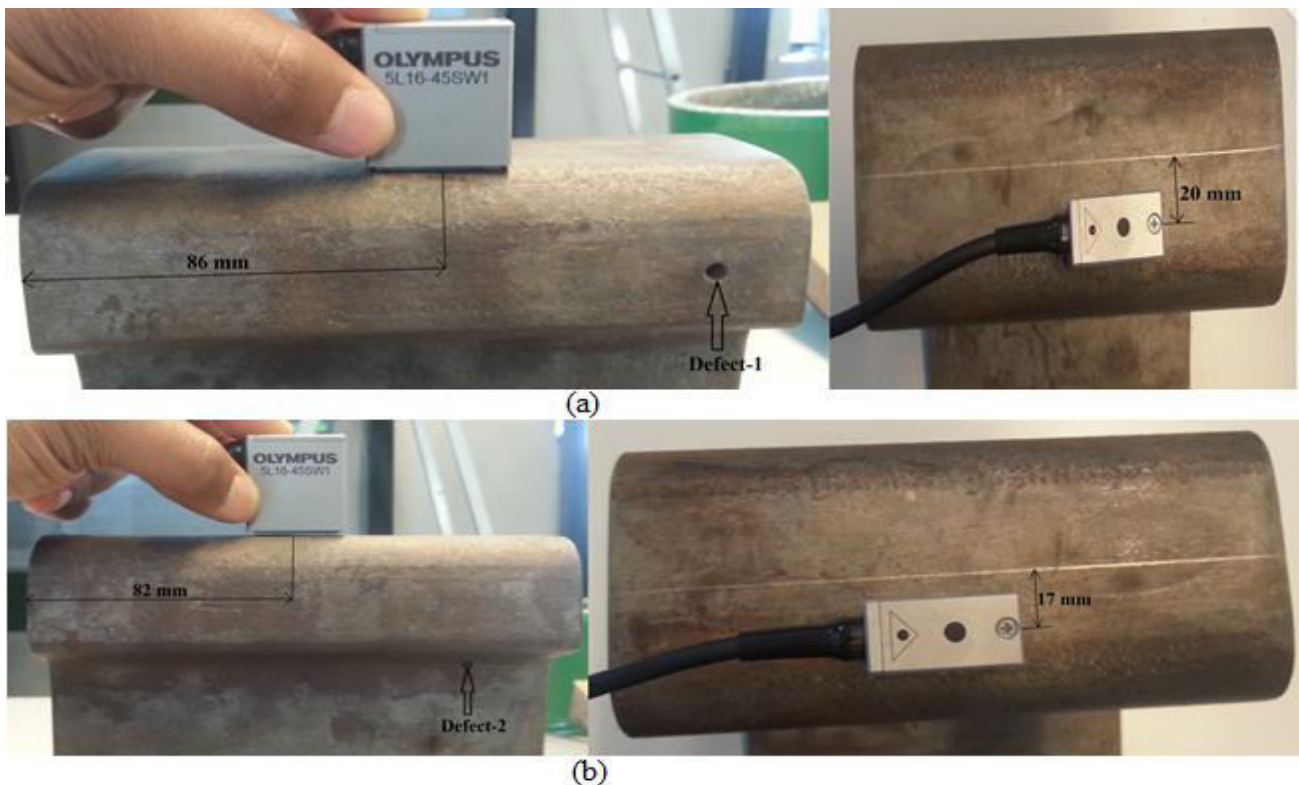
Position of PA1 on the test sample (a) for inspecting defect-1 (b) for inspecting defect-2
